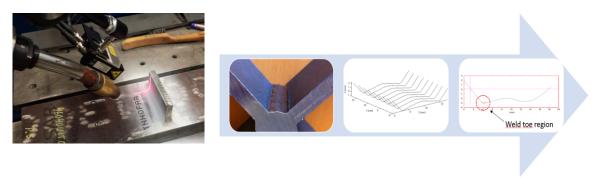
Illustration of the automated weld quality measurement system
